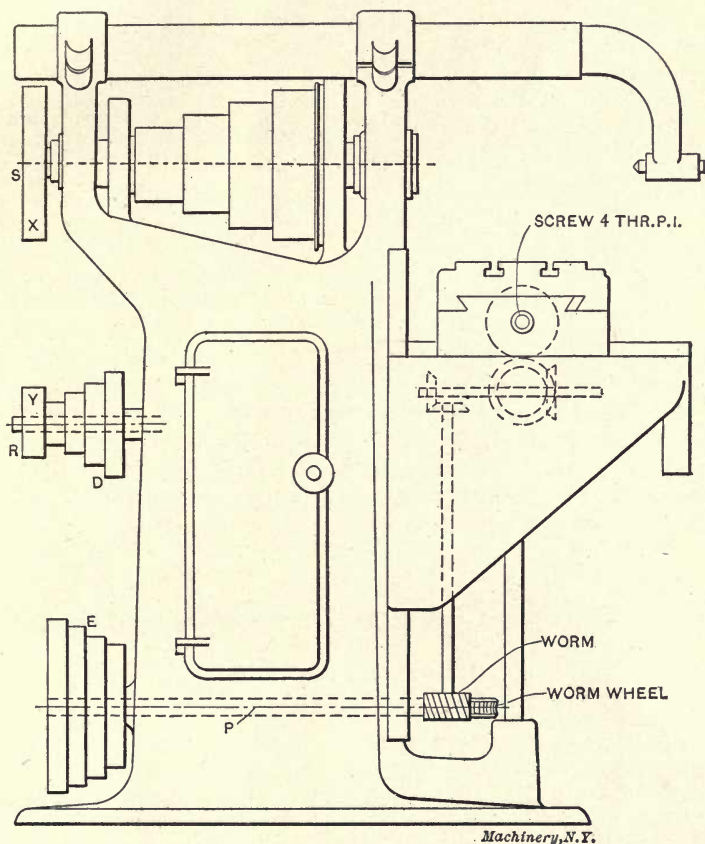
General View of Milling Machine, having Cone Pulley Feed
